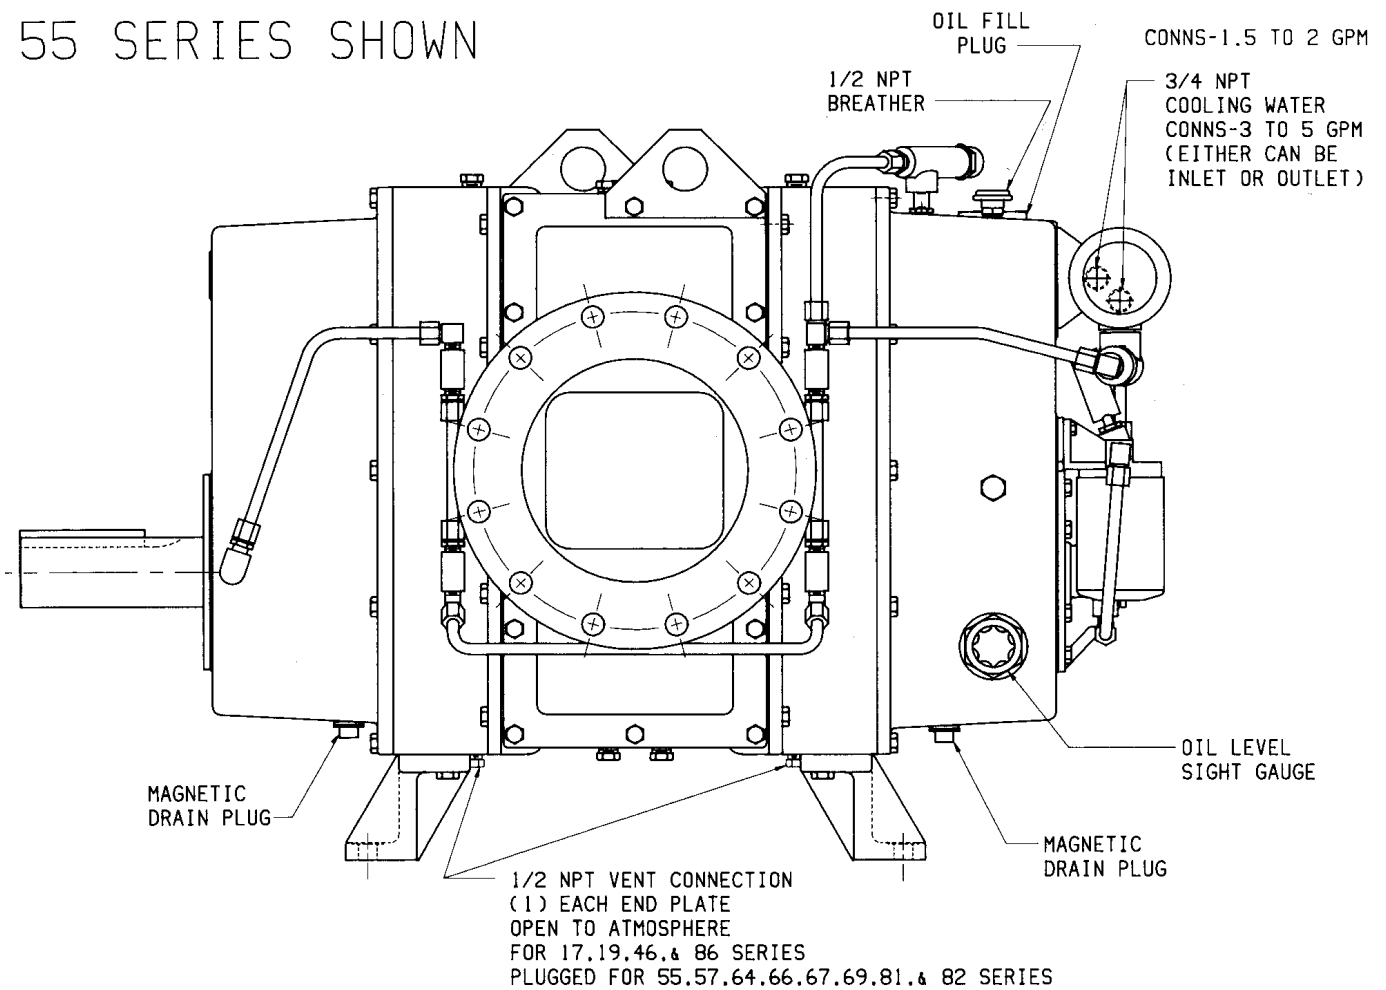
Locations of Key Components for Pressure Lubricated Blowers
